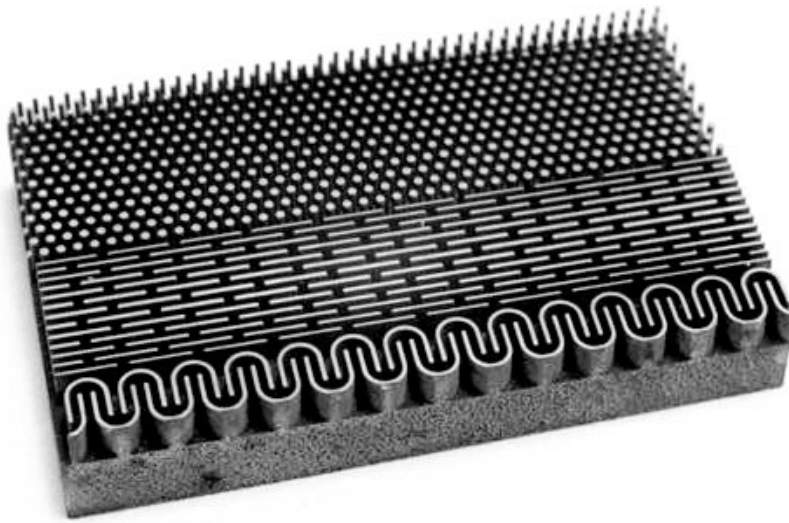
Demonstrative specimen of 40Cr13 steel (20 × 30 mm) machined with ECM-1500A machine.
